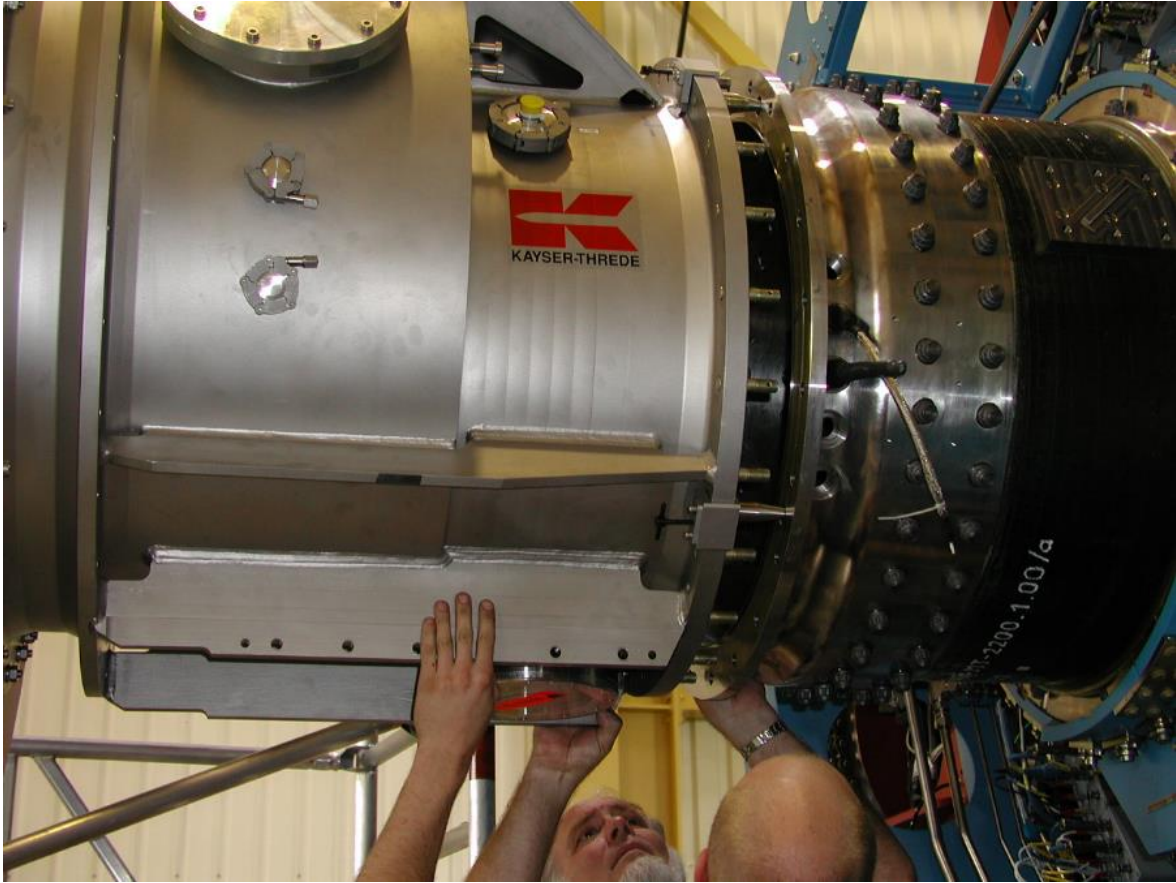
NASA Ames technician John Wallace helping attach the instrument flange assembly – Mid-April 2002.
